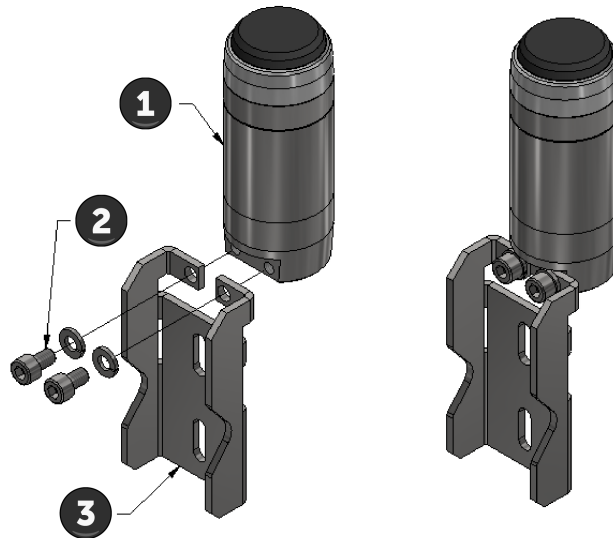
4: Attaching Ranger Pro Interface Module to Mounting Bracket
